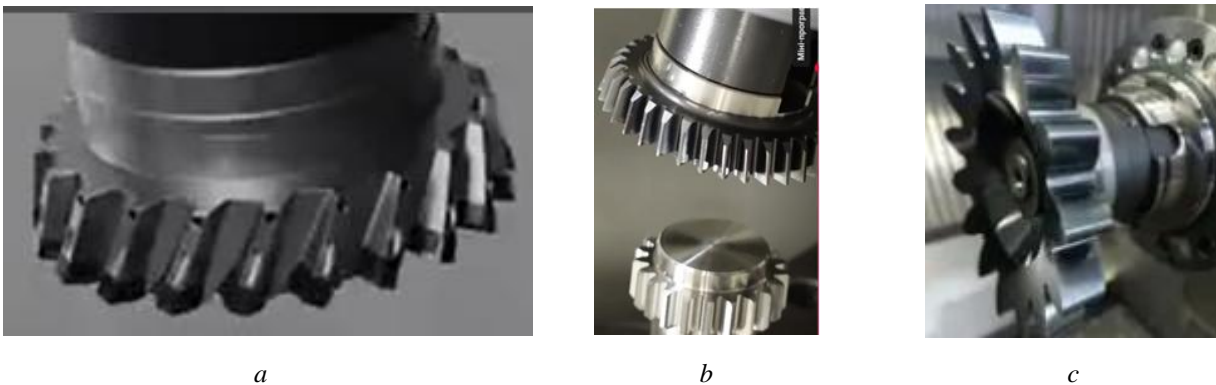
Cutters with replaceable inserts, a positive rake angle, and a positive clearance angle (a, b) and conical cutter for helical gears (c)
